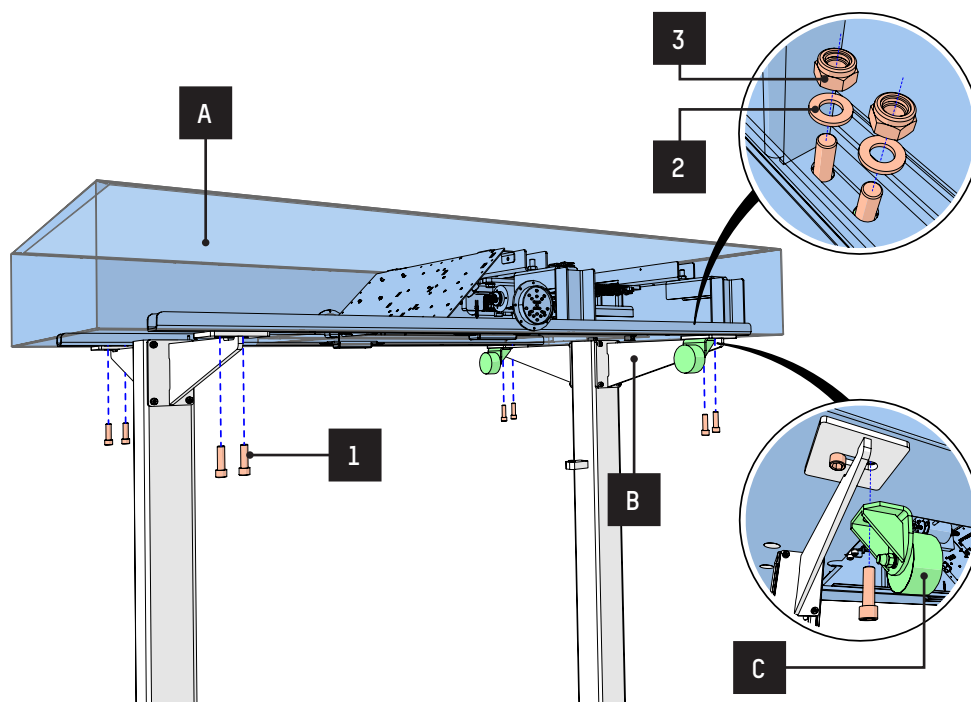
Installing the Uprights Connection Gussets - Head Unit
